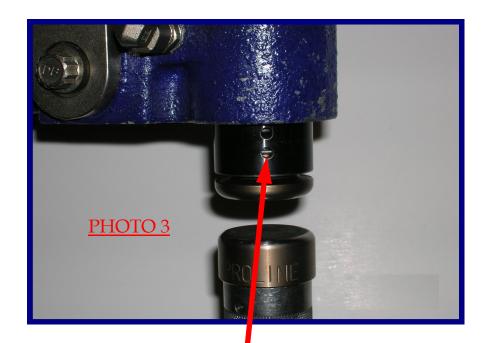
ON NEXT PAGE SHOWS THE DIE CLIP SPRING IN THE GROOVE OF THE DIE. SOMETIMES THE BROKEN PIECE OVERLAPS THE REMAINING PIECE AND LOCKS THE DIE IN. TAKE A PUNCH AND HOLD THE DIE CLIP SPRING TIGHTLY THROUGH THE HOLE AND THEN SPIN THE DIE TO TRY TO UNWEDGE THE PIECES OF THE DIE CLIP SPRING. GO BACK AND TRY ANYONE OF THESE THREE METHODS.
